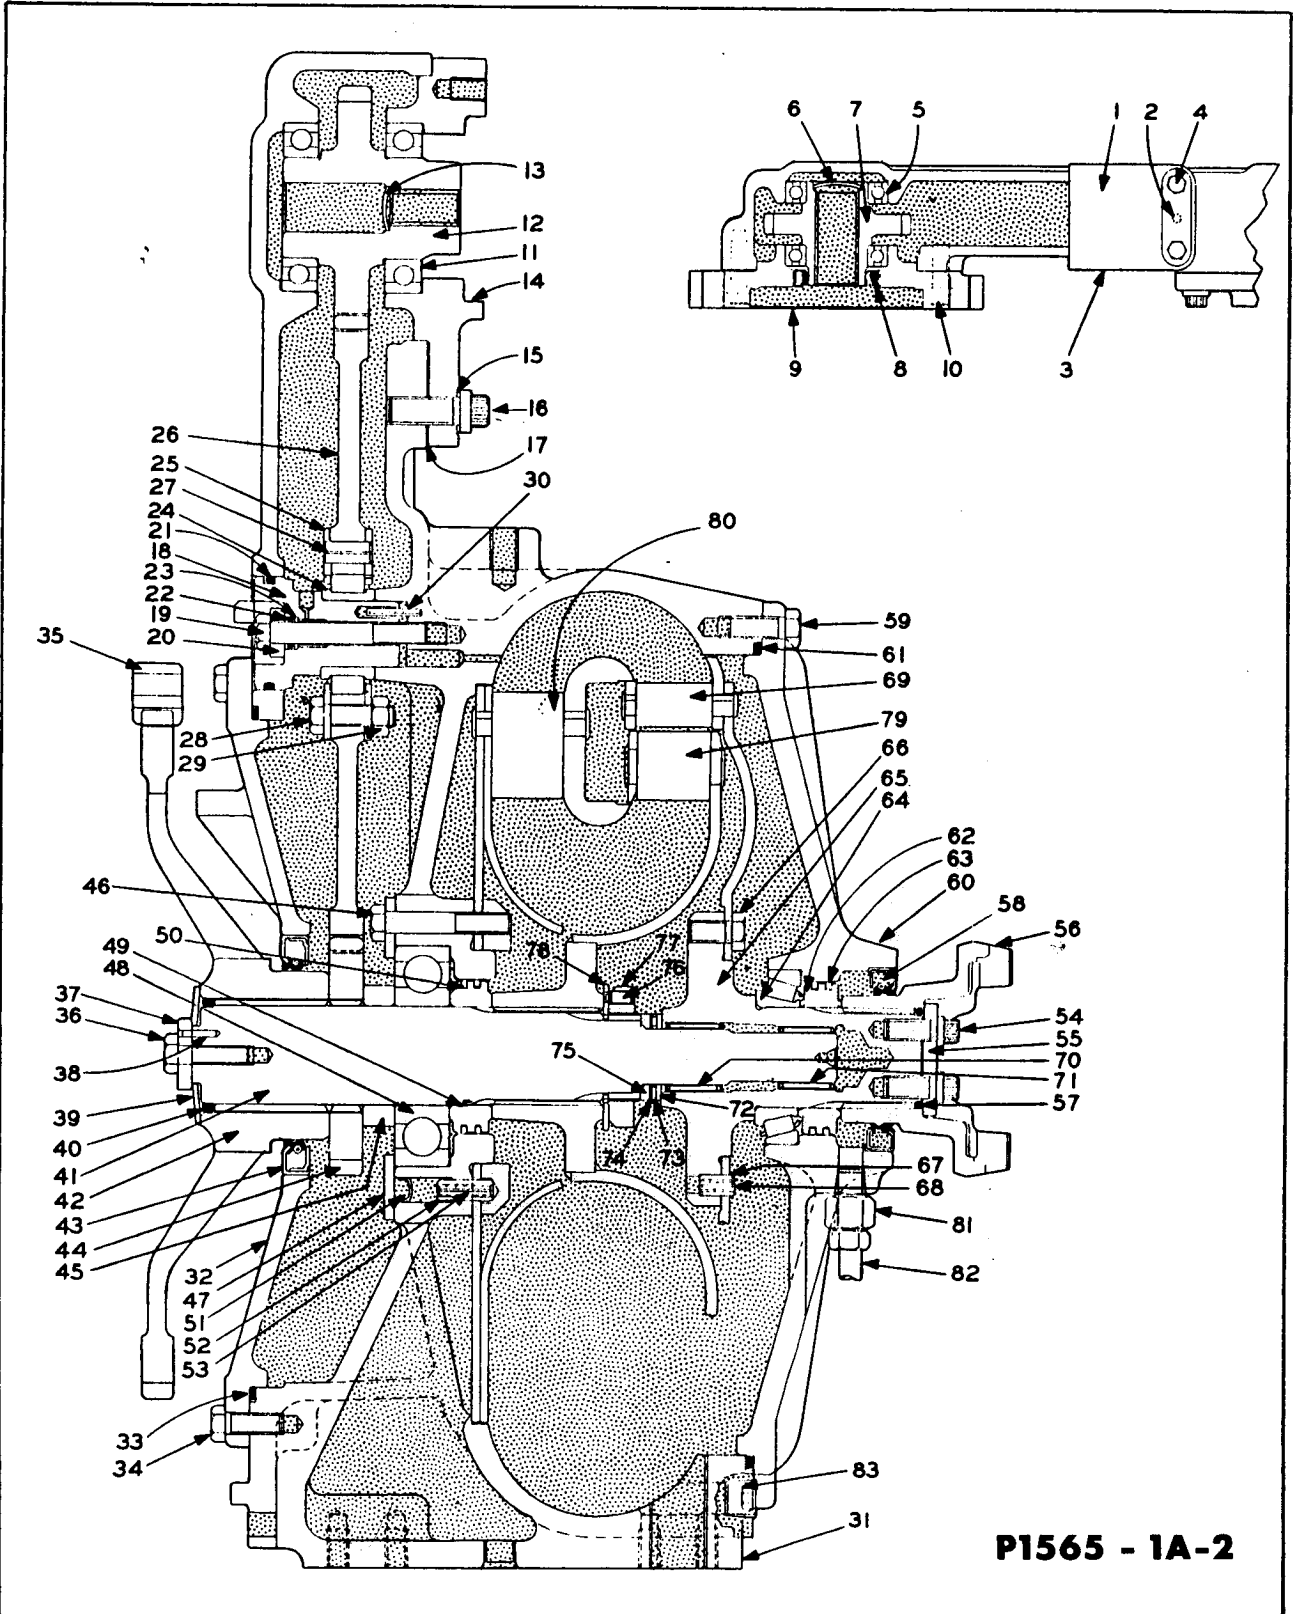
Cutaway View of P-1500 Series Torque Converter
